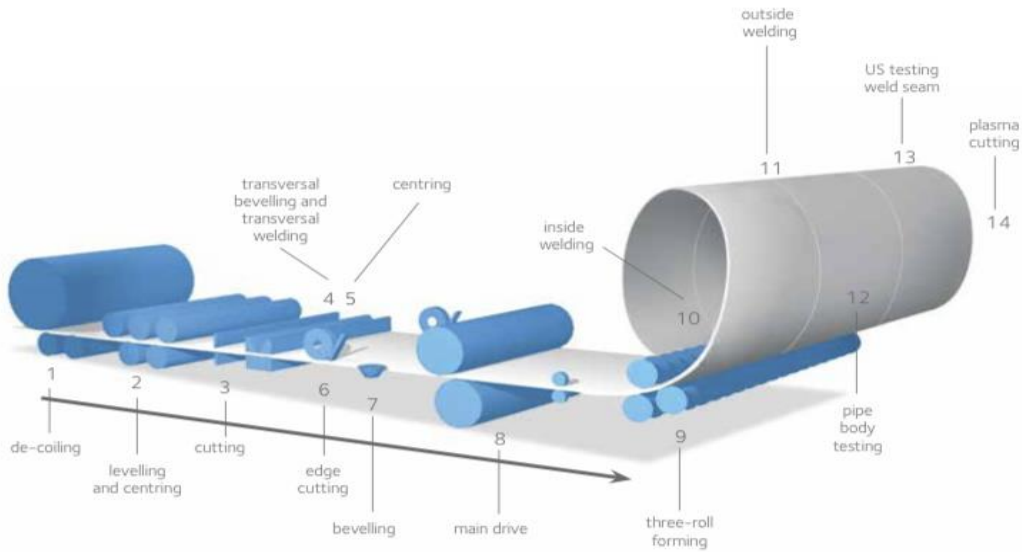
10 Spiral submerged arc welding (SSAW) process [35].
